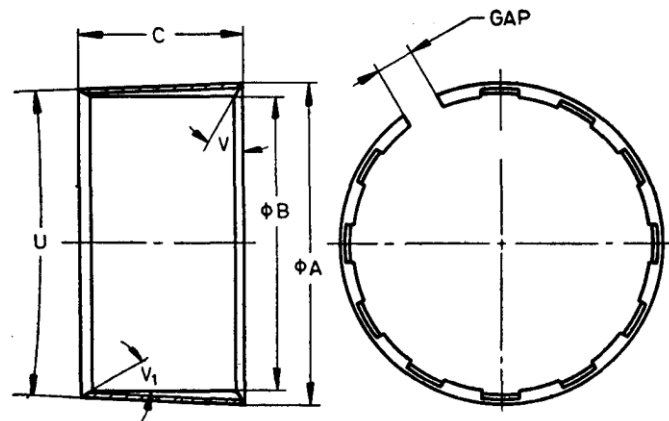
'WF' DESIGN DOUBLE TUBE CORE BARREL — REAMING SHELL
